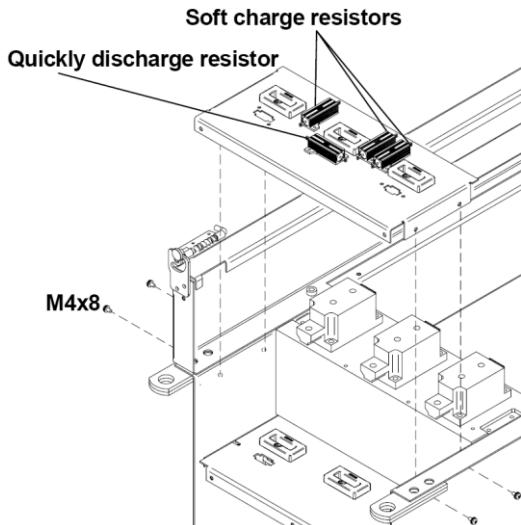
Assembly of the Soft charge and quick-discharge resistors (b)
